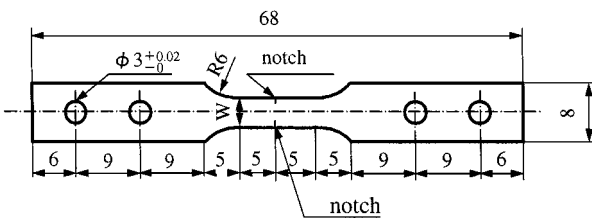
Cut out method of a specimen from the plaque (70 × 70 × 2 mm).
